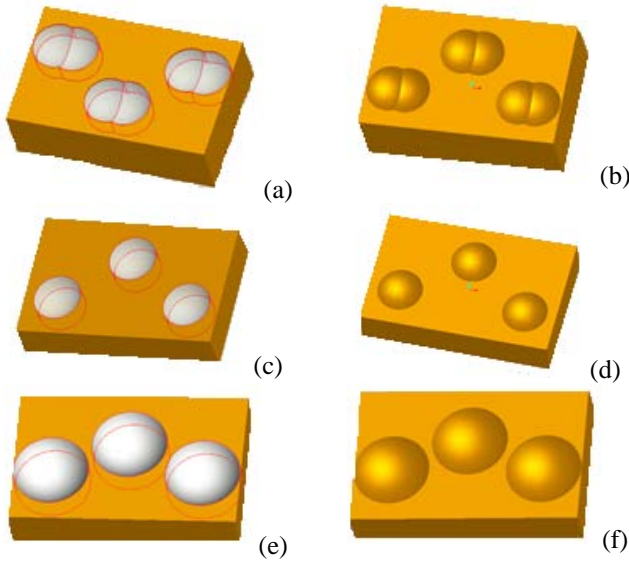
Featured Copper Block; (a) Rohacell Double Dimple, (b) Full Copper Double Dimple, (c) Rohacell Small Dimple, (d) Full Copper Small Dimple, (e) Rohacell Large Dimple, (f) Full Copper Large Dimple
